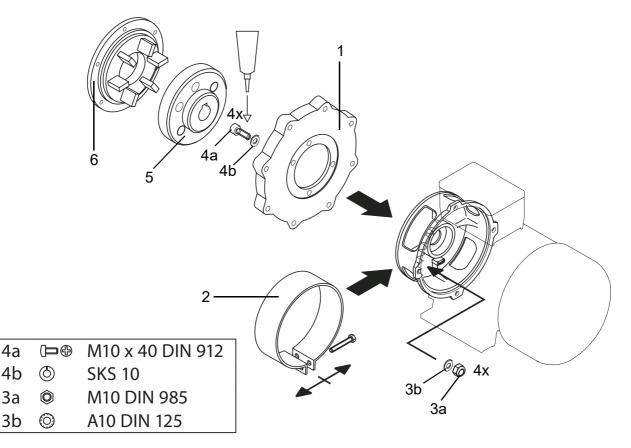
Assembly of flange mount (dual-bearing, BG 132 model with standard bearing plate)
